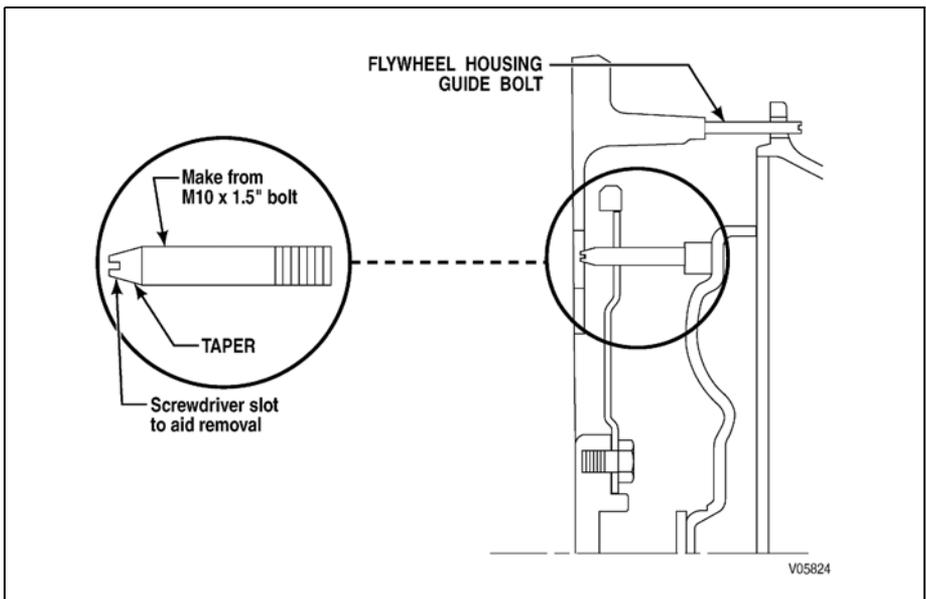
Pilot Tool for Transmission-To-Engine Alignment
